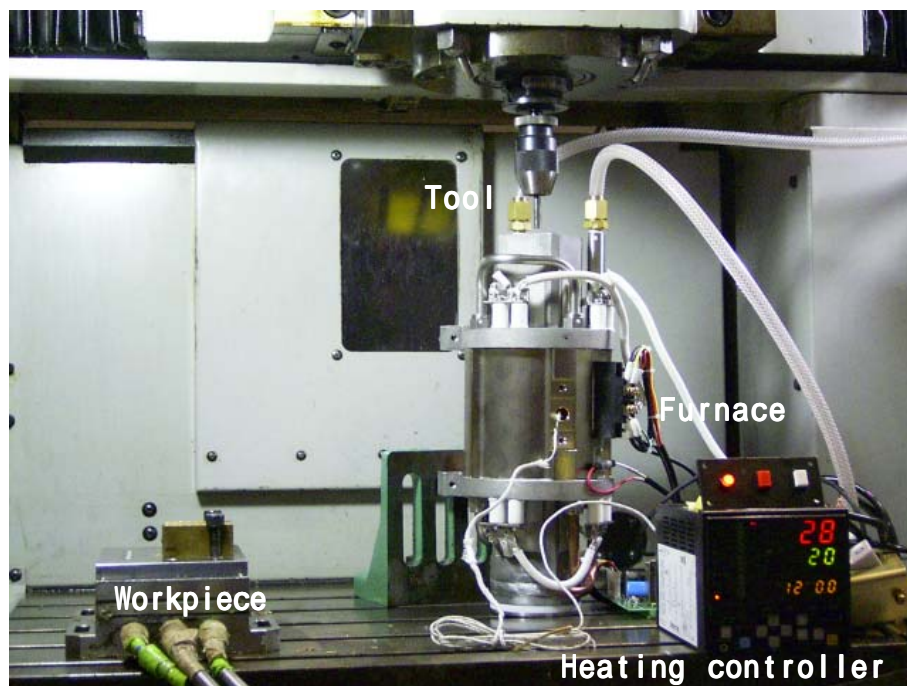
Prototype of on-the-machine grinding tool re-generator
